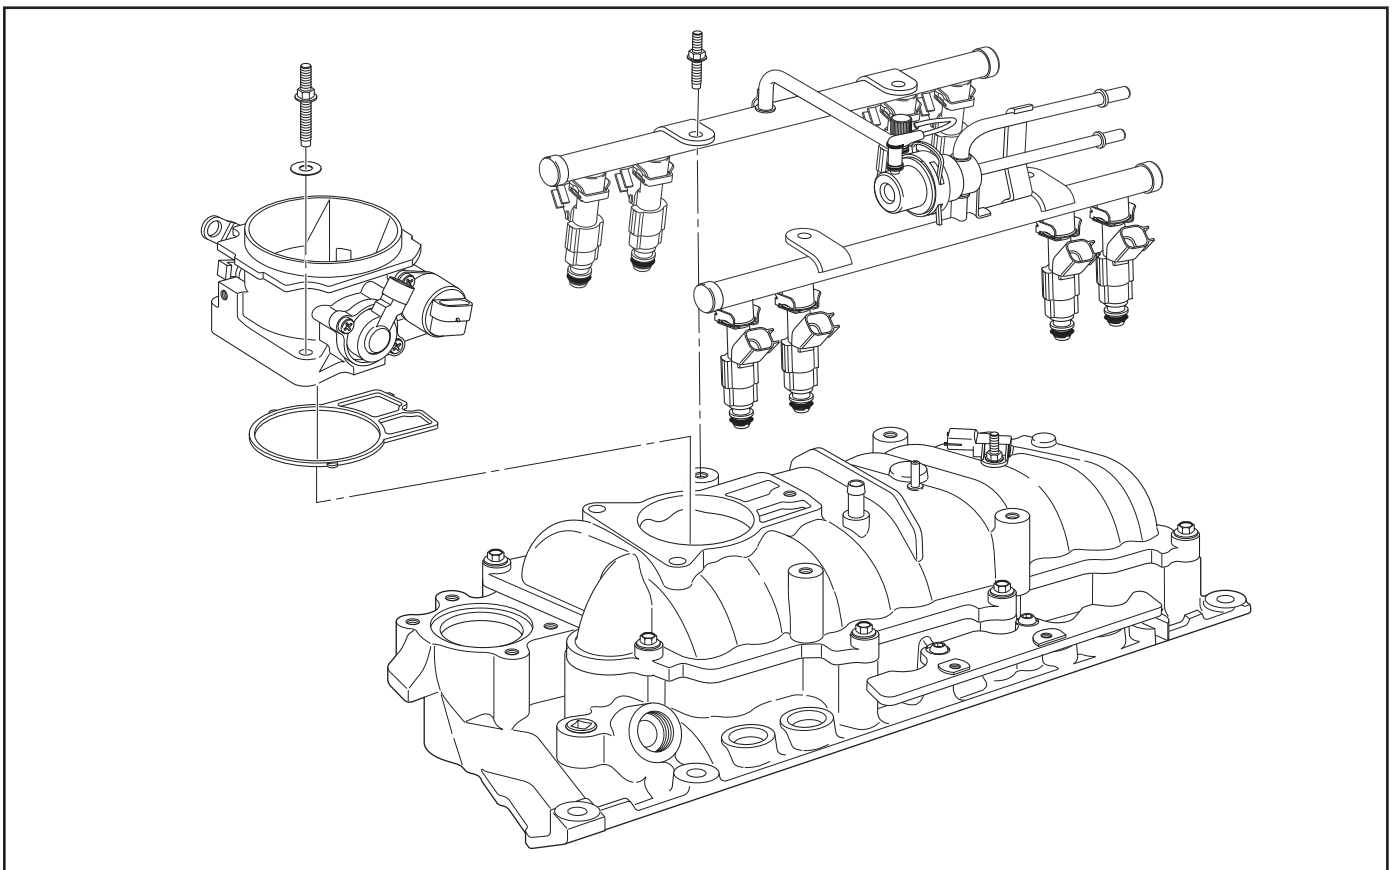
Fuel Rail and Throttle Body Assemblies
